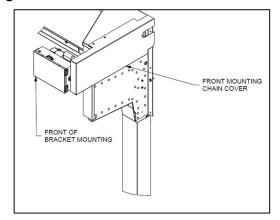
FRONT MOUNTING CHAIN COVER OPTION
